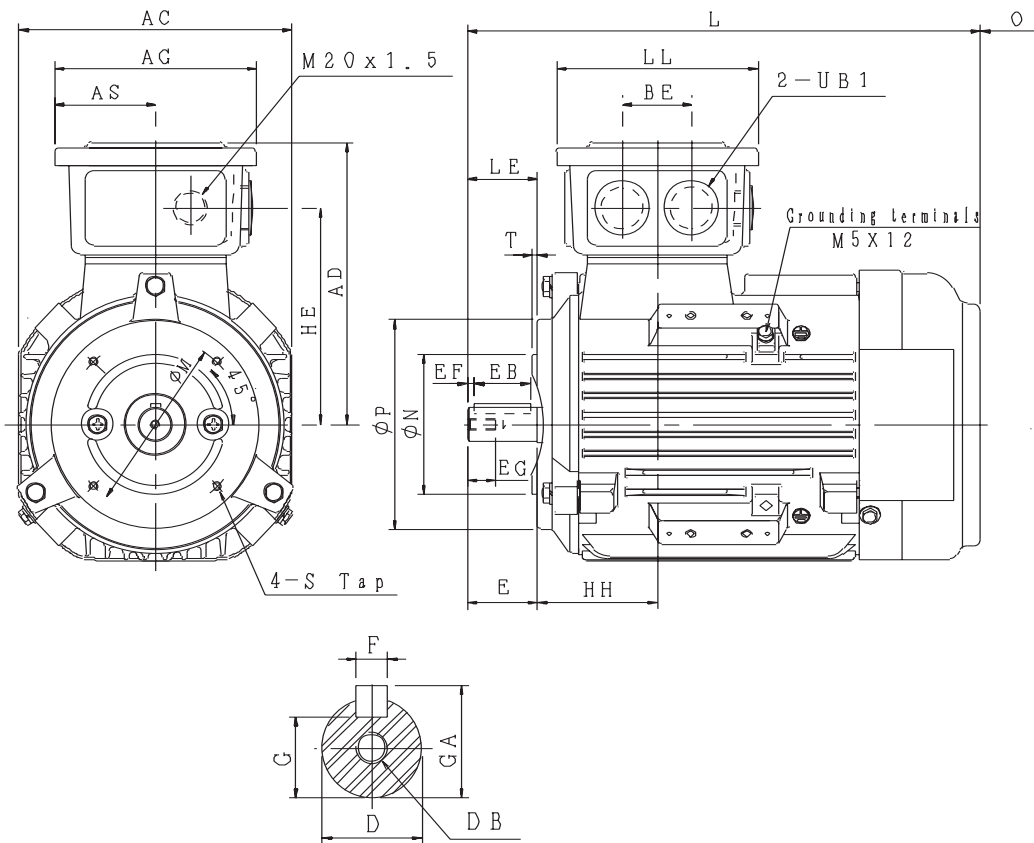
Outline drawing of cast iron design, feet version, mounting B14; frame size 80M - 112M
